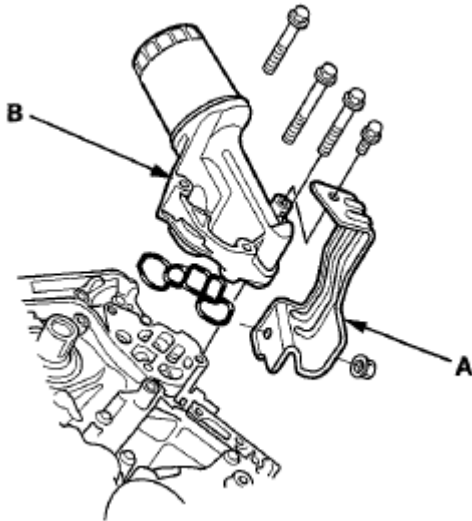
Identifying Oil Filter Base & Oil Filter Assembly
